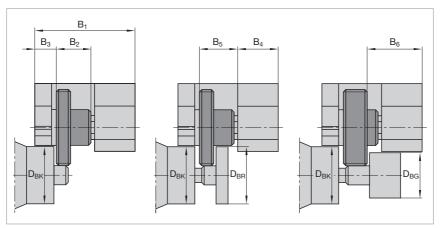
Width dimensions and shoulder diameter at the tangential rolling head
